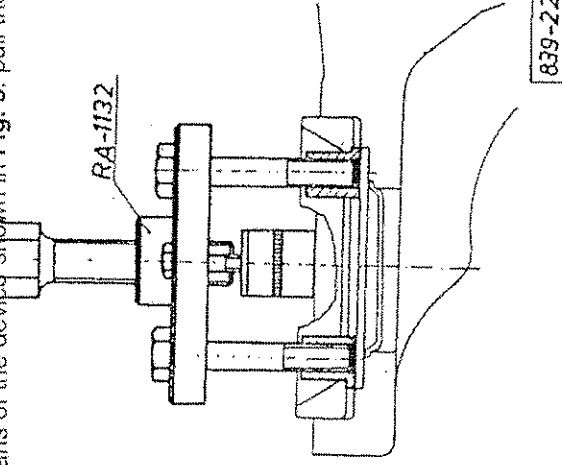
PULLING OUT THE TAPER ROLLER BEARING CUPS
